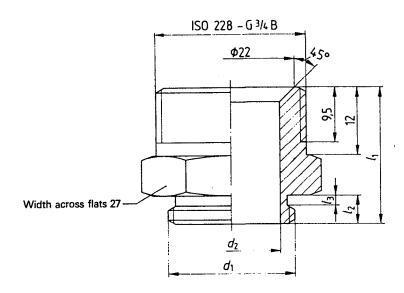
Adaptor with external thread (A3) for the connection of outlet fittings
